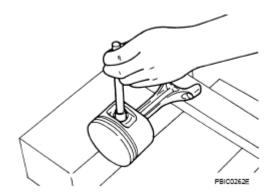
Pushing Out Piston Pin Courtesy of NISSAN MOTOR CO., U.S.A.
